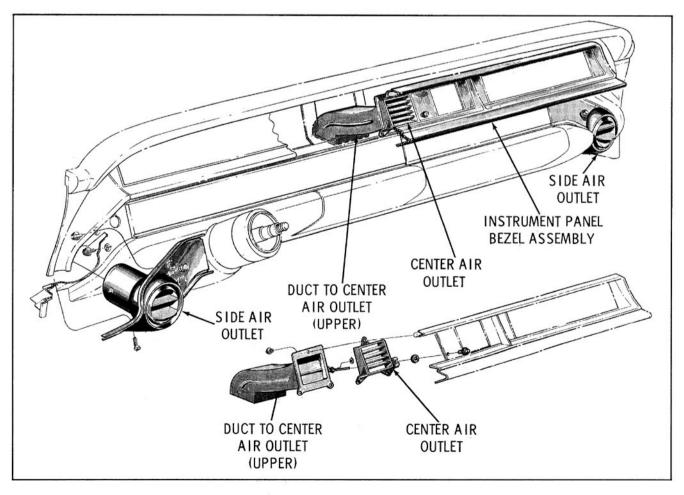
Air Outlets and Controls (33 - 34 - 35 - 36 - 38 & 39 Series)
